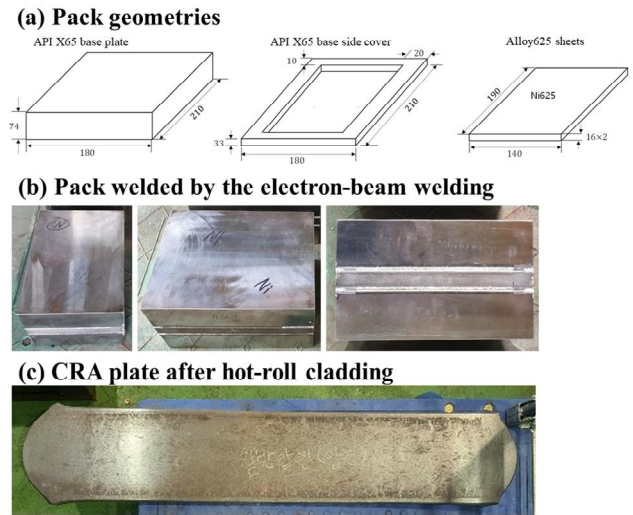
Hot roll cladding conditions: (a) Rolling pack geometries; (b) The pack welded by the electron-beam welding; (c) CRA plate after hot roll cladding
